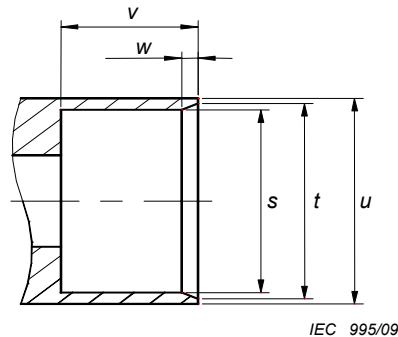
Gauge for outer contact of socket connector (for dimensions, see Table 3)
